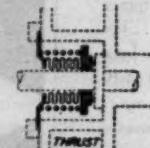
Shaft Seal—Widely used for refrigeration compressors to prevent leakage around revolving shaft. Spring pressure holds nose of seal against stationary plate. Another type uses rollers with shaft and seals against stationary plate.
